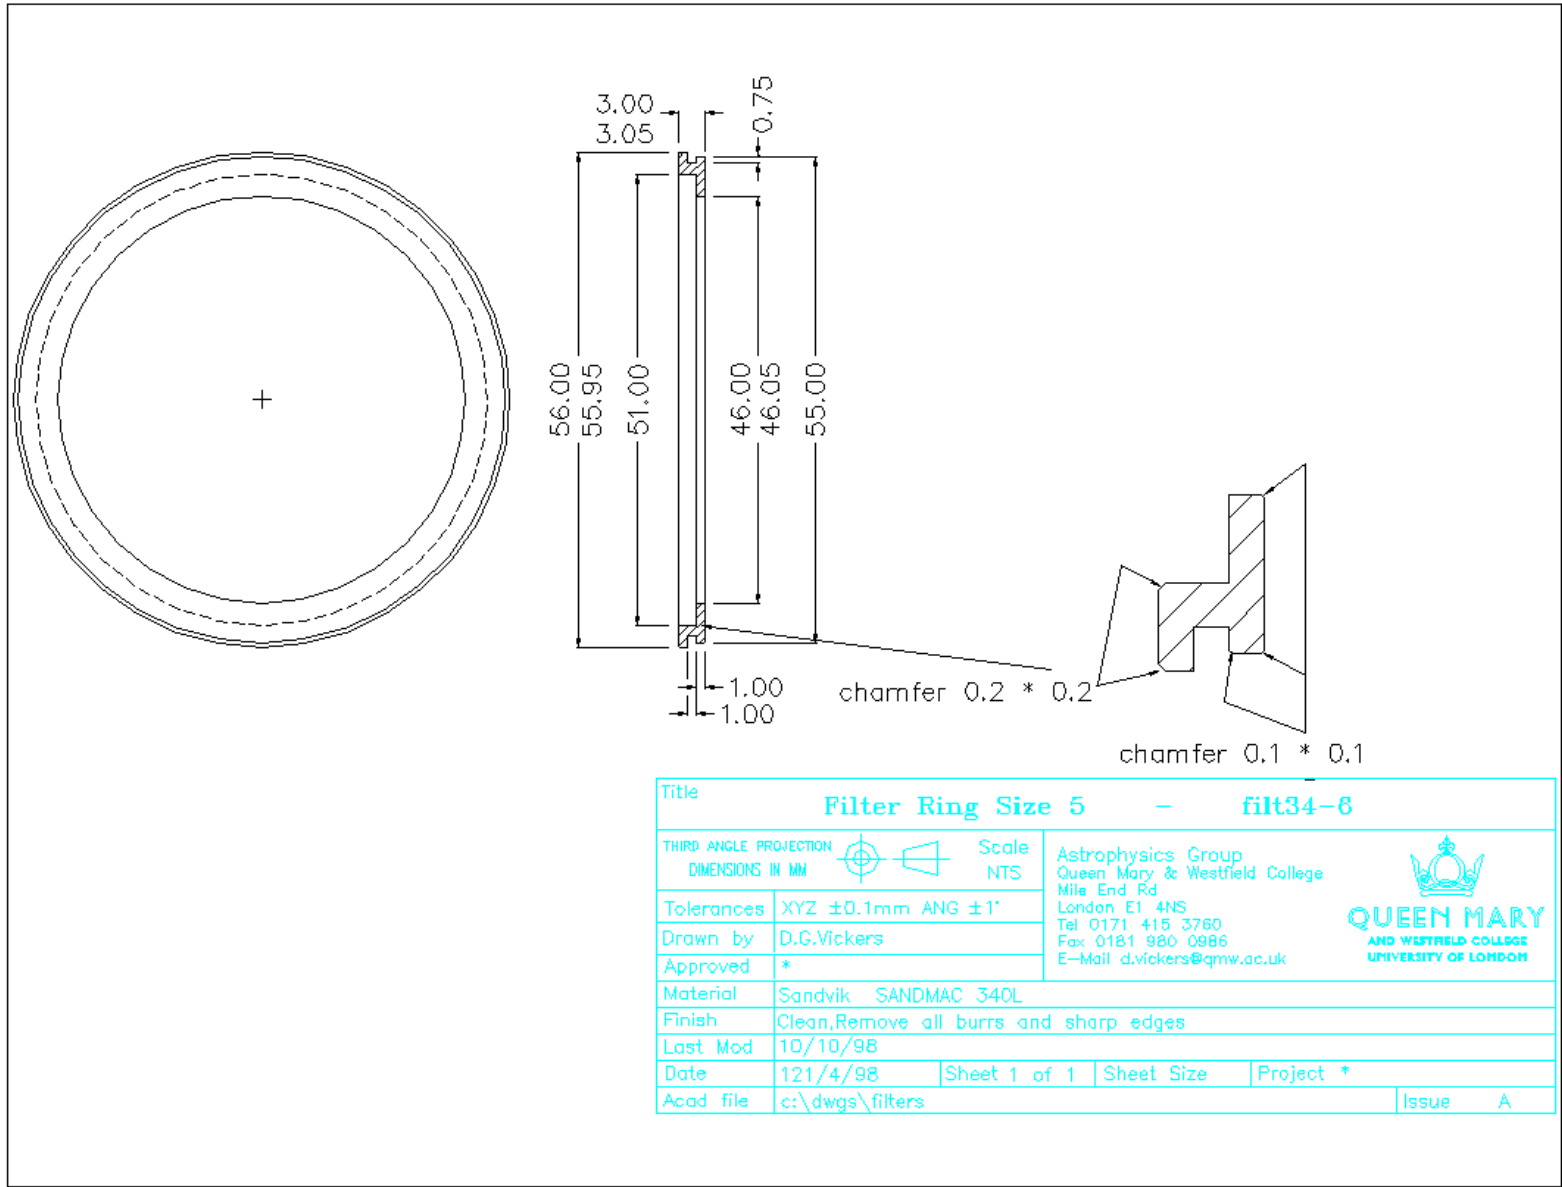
Size 5 filter ring component drawing (two per assembly)
